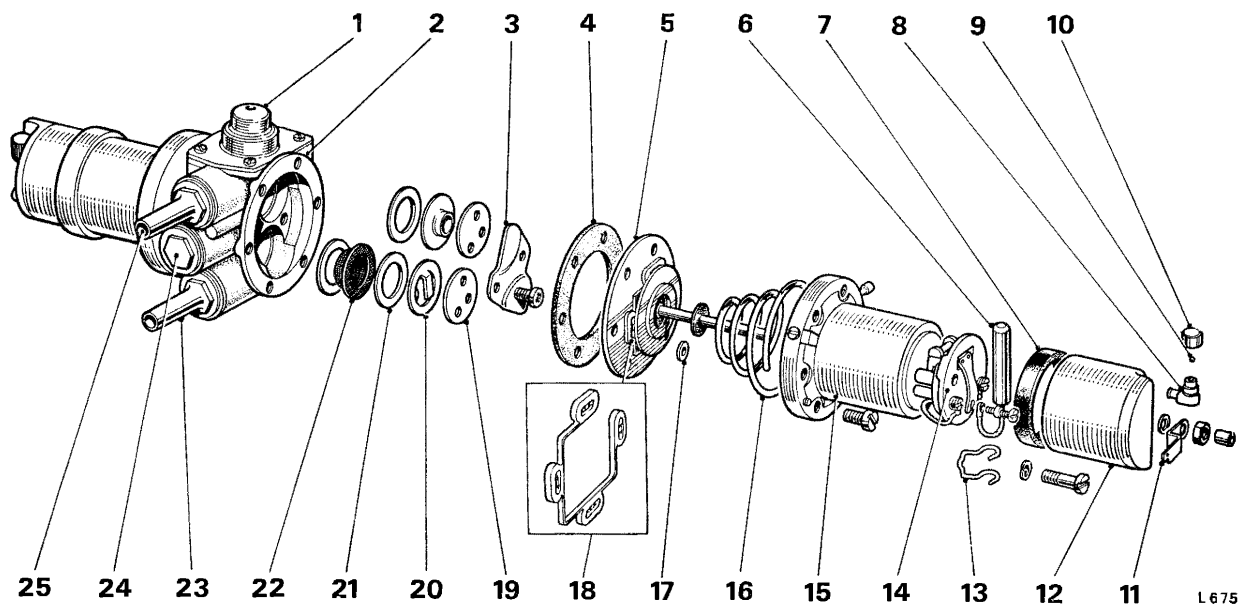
EXPLODED VIEW OF FUEL PUMPS
